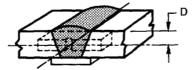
Weld Pad for Chemical Analysis of Weld Metal
